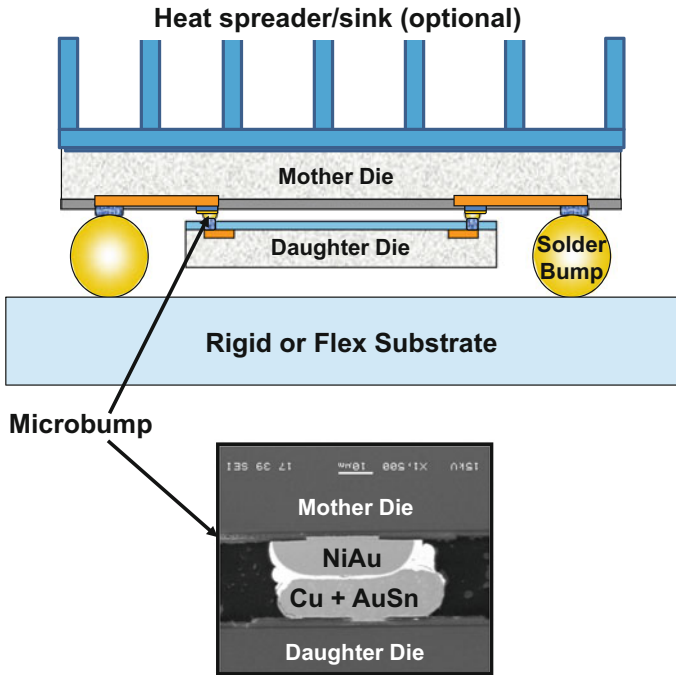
Chip-to-chip (Face-to-face) 3D IC packaging
